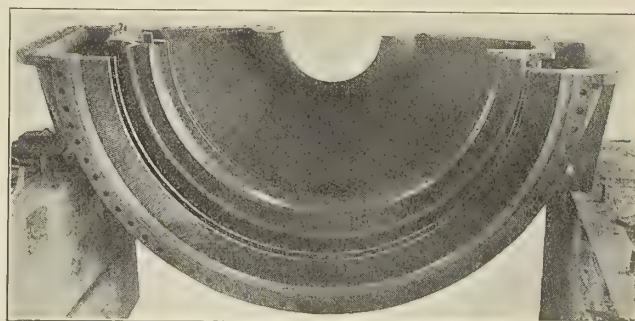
LOWER PORTION OF EXHAUST END CASING.
